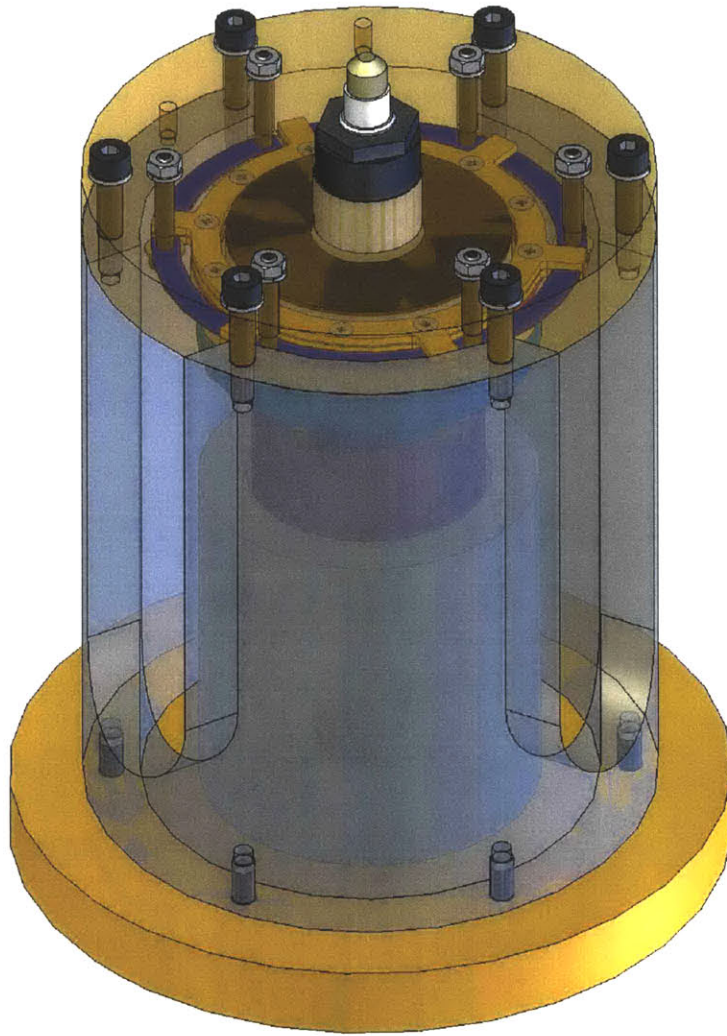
Solid model of compression test device (Some parts shown transparent to clarify assembly).
